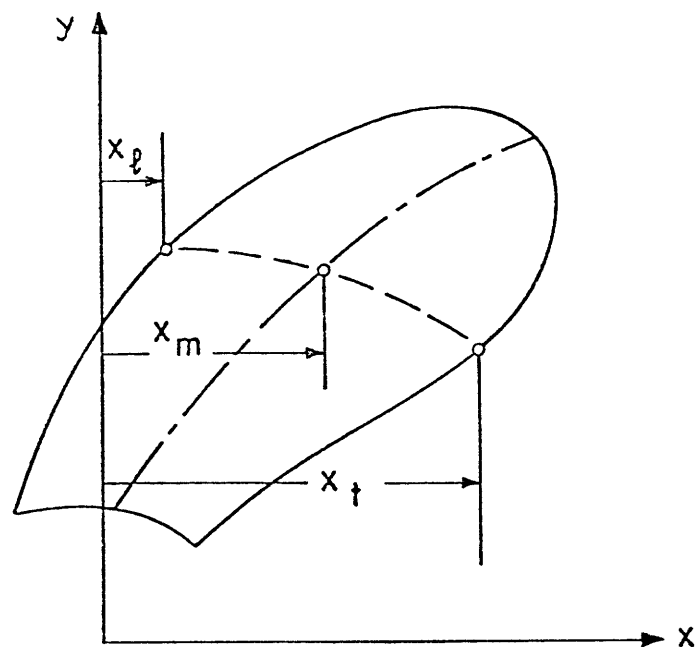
Longitudinal elevation of propeller blade looking to starboard
